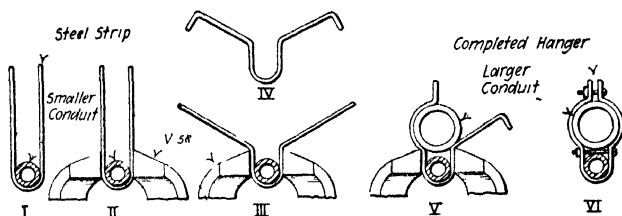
Illustrating the steps in the construction of a double-conduit hanger strap
